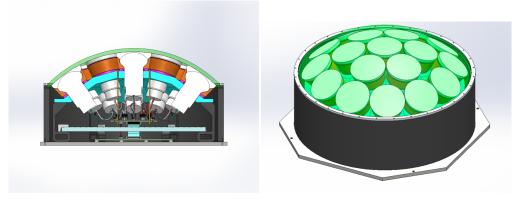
Left: The cross section view of the mPMT module with 19 8 cm diameter inward-facing PMTs, and integrated front-end electronics. Right: The external view of the mPMT module.
